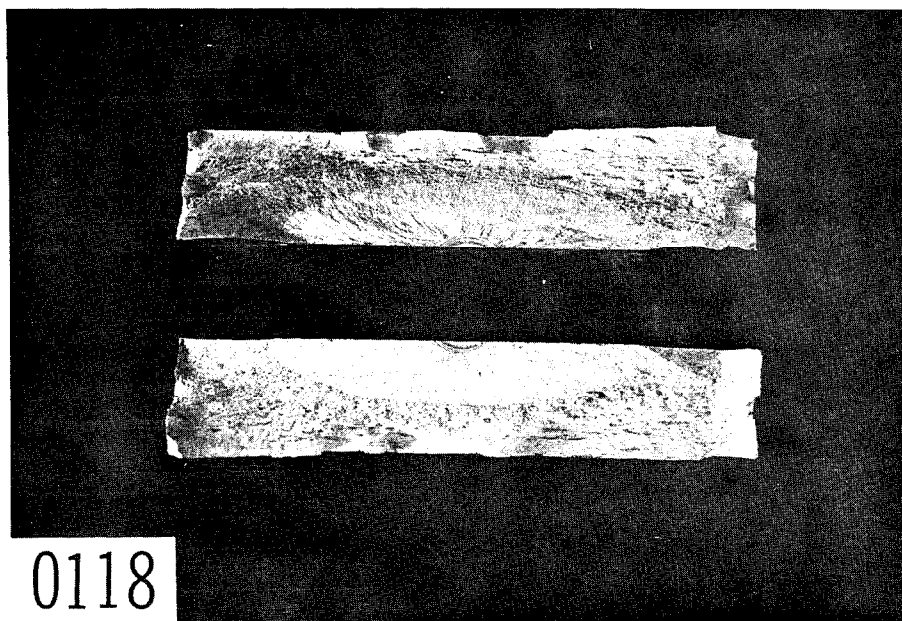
Macroscopic view of a Lehigh fatigue specimen of Ti-6Al-4V showing fatigue and monotonic fracture surfaces. 1X.
